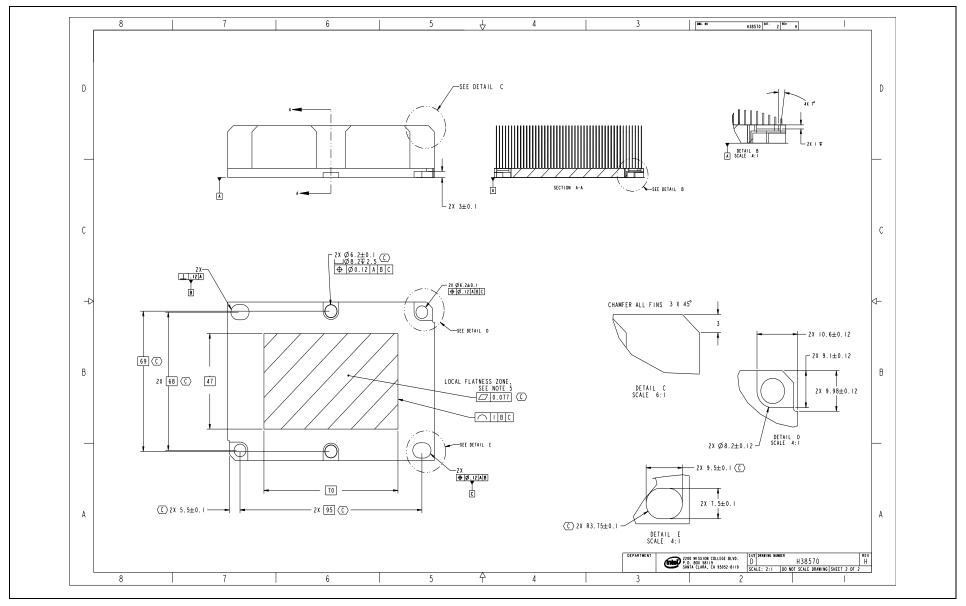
1U Extruded Heatsink Assembly (Sheet 1 of 2)
